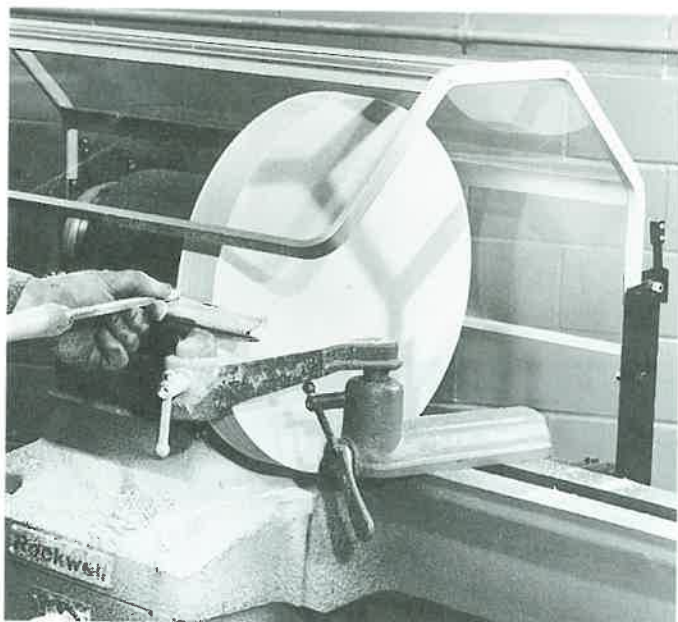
Face plate turning. (Delta International Machinery Corp.)
